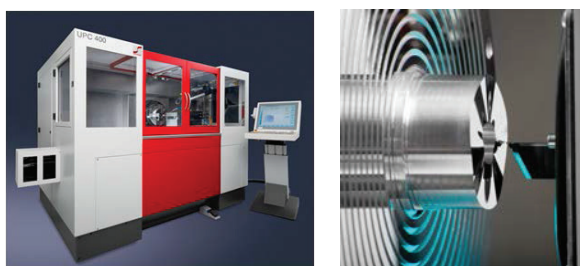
UPC 400 with close-up of the fast tool system cutting a sinusoidal mirror.
